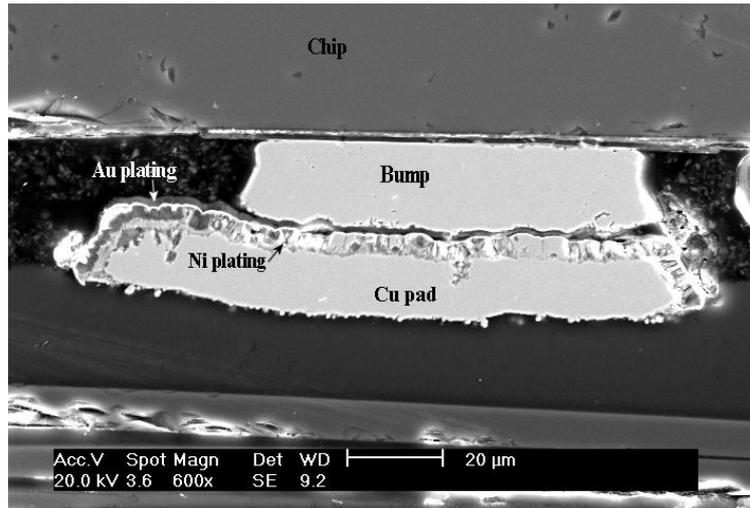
Corrosion of the Ni layer revealed to be the failure mechanism after salt spray testing.
